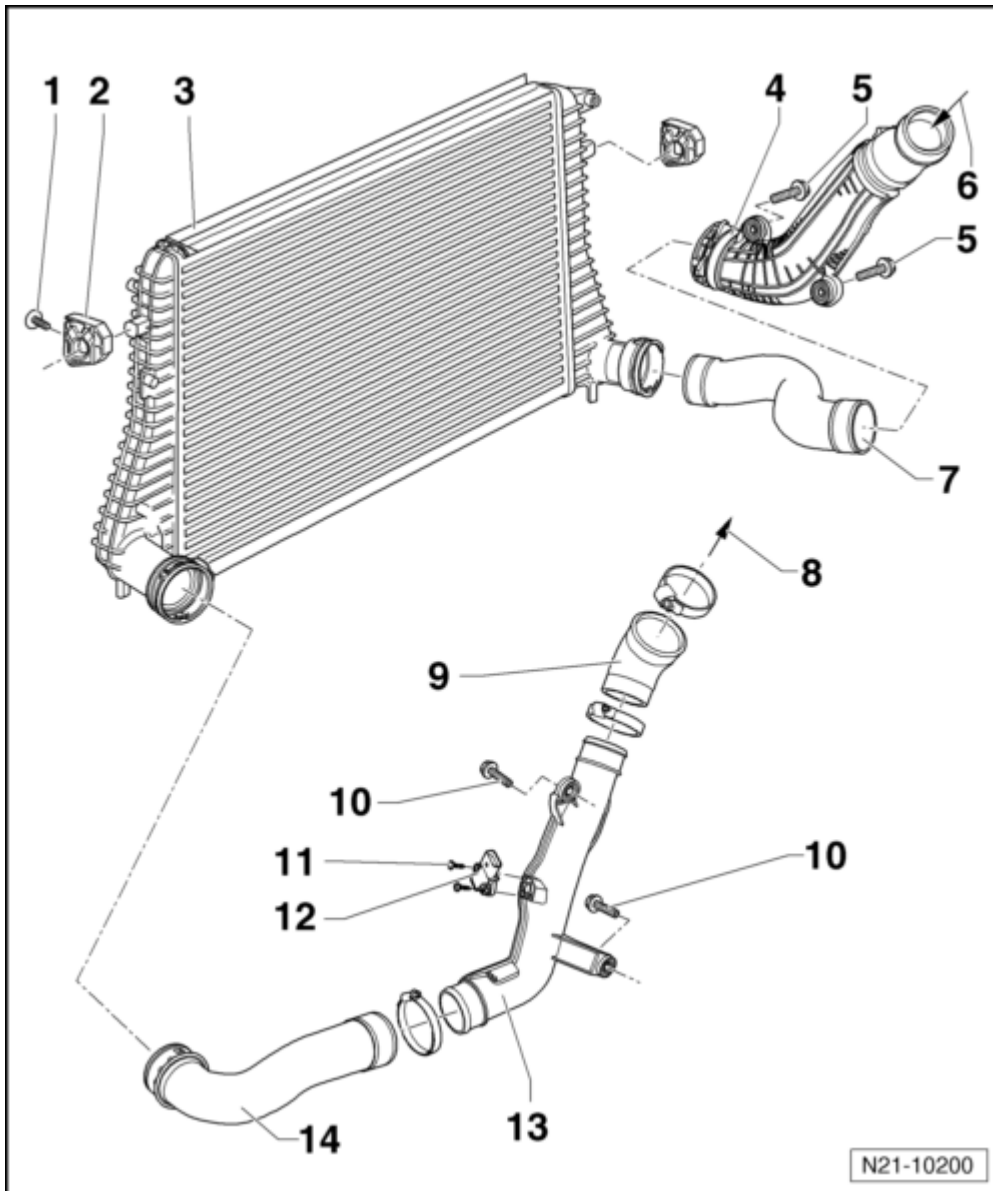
Identifying Assembly Overview: Charge Air Cooler System
